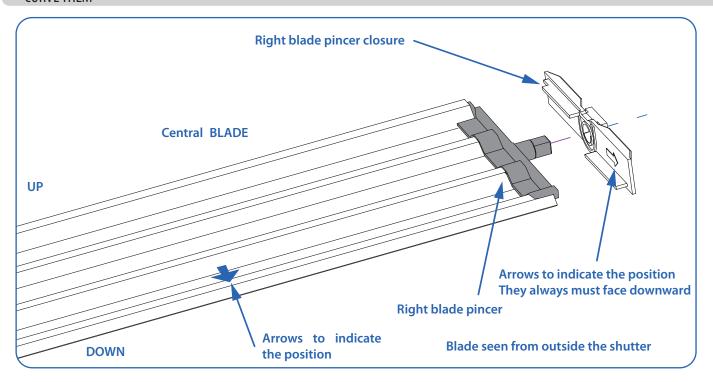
Detail. Insertion of the right pincer blade closing device on the central blade.
